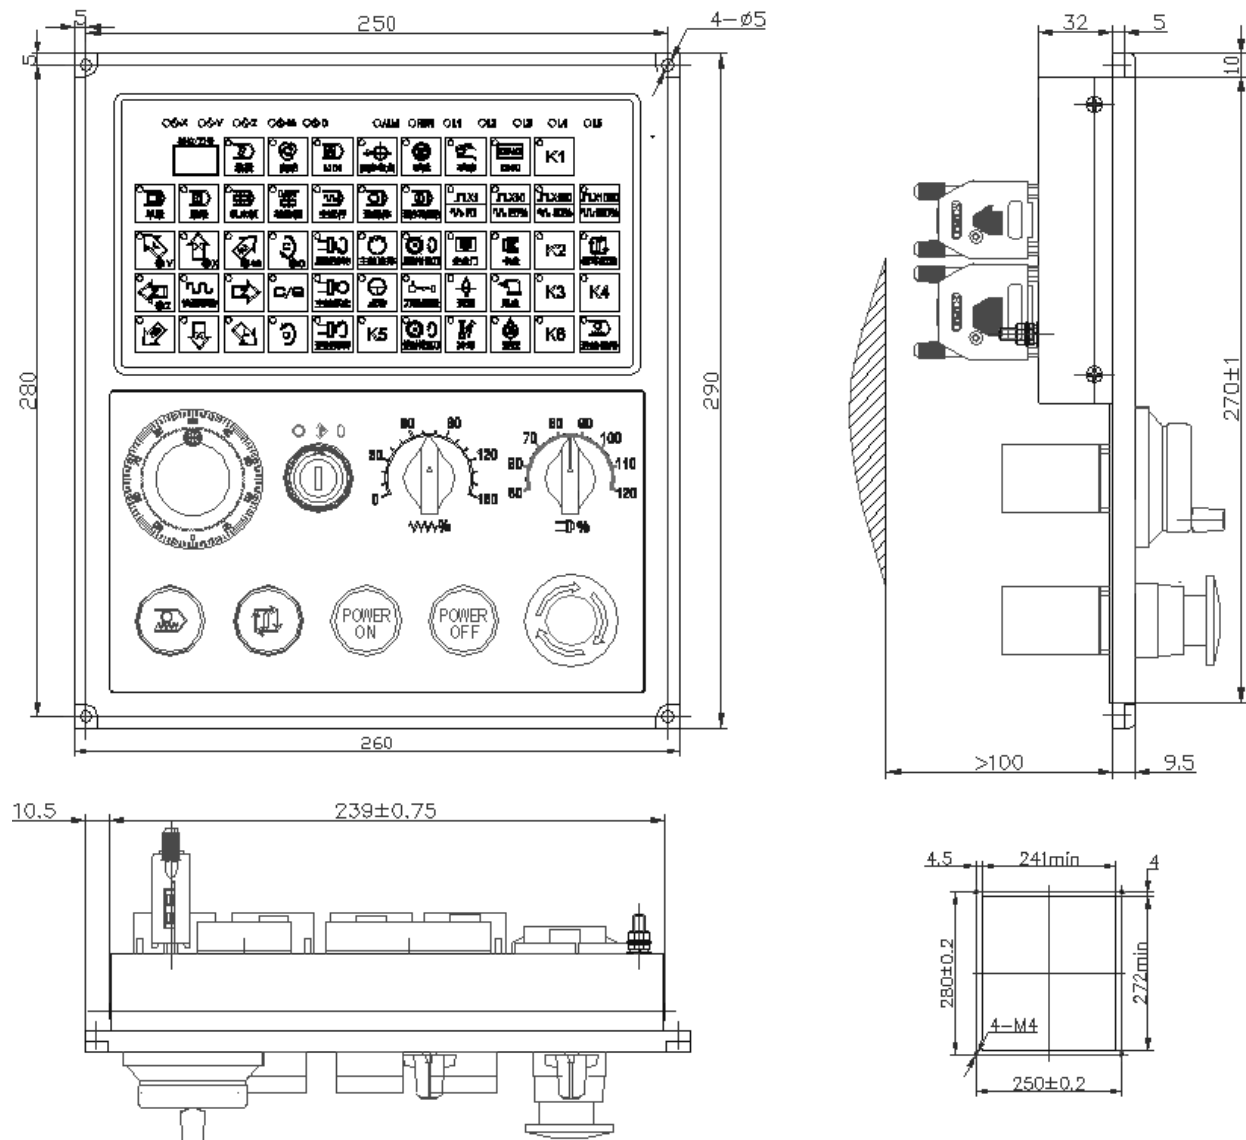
The installation dimension of machine operation panel MPU-08E
